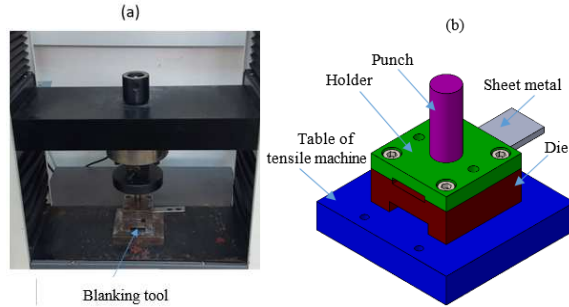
(a) Blanking trial and (b) 3D scheme of tools
